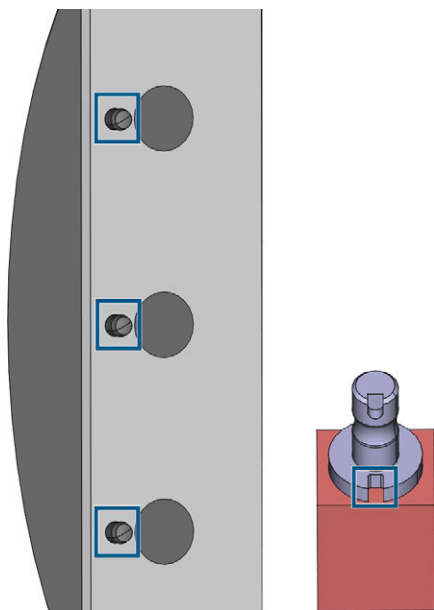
POSITIONING PINS (LEFT MARKINGS) MUST LIE IN THE GROOVE IN THE SHAFT (RIGHT MARKING)
